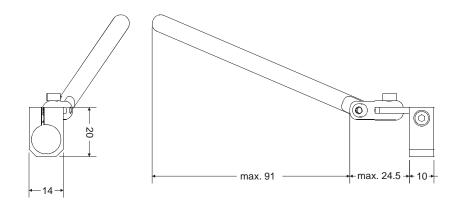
Dimensions Mounting Bracket / Holding arm
